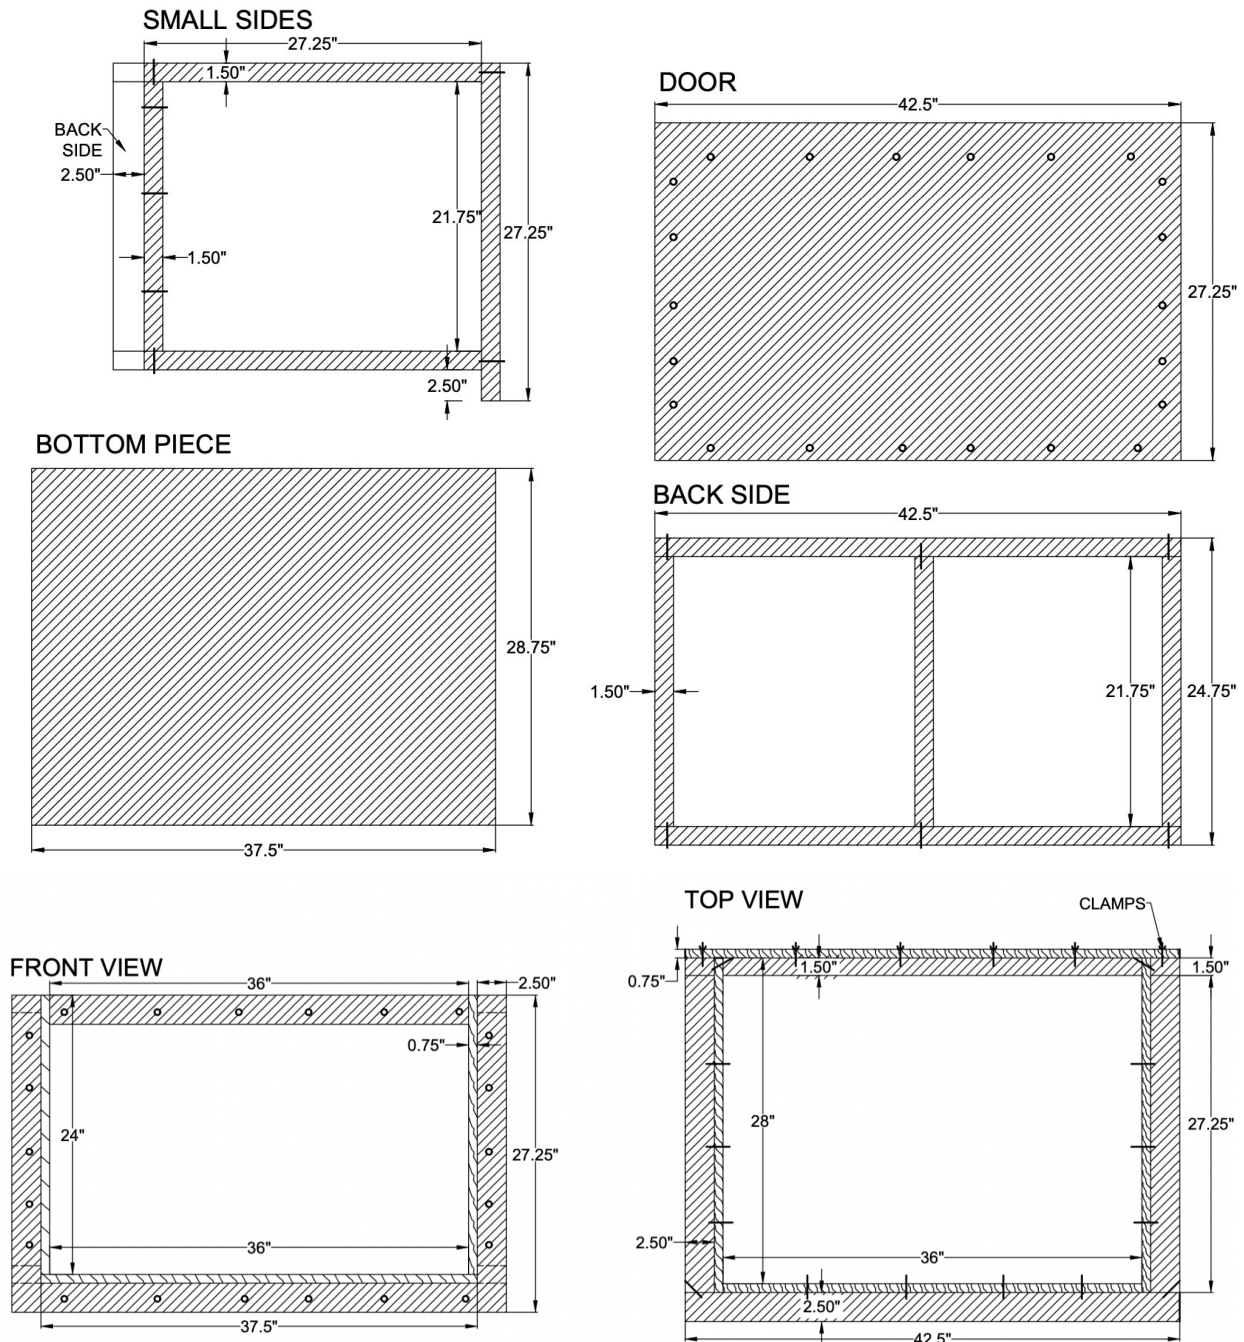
Box 1 Dimensions and Orthographic Projection from Two Views
